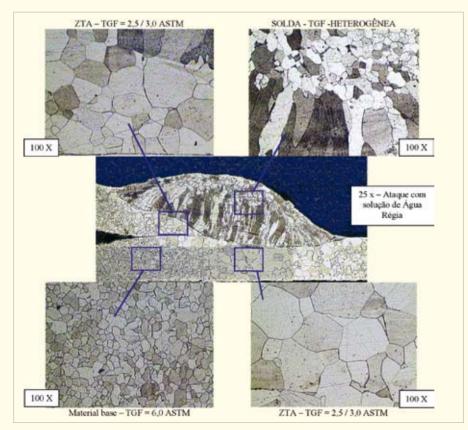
Joint welded with Arcaloy 430Ti.
